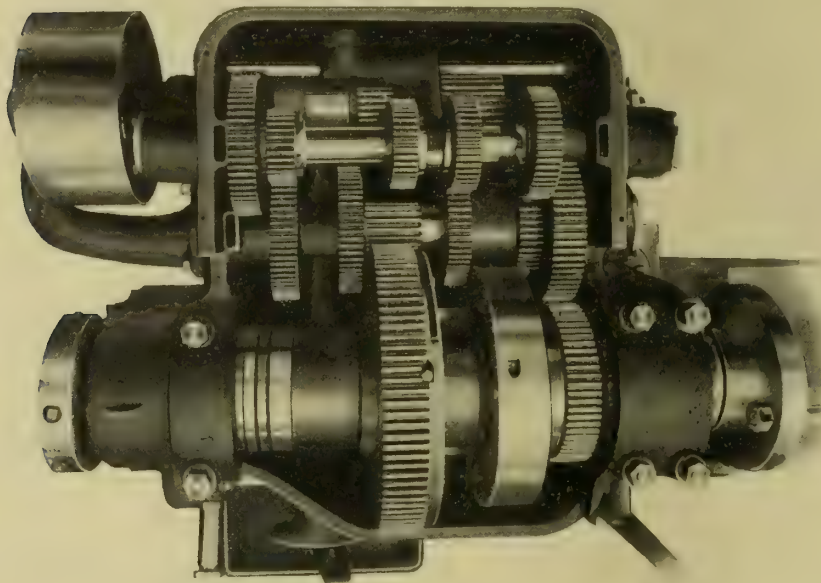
9IN. CENTRE "PARKSON" LATHE. ALL GEARED HEADSTOCK, WITH COVER REMOVED.
